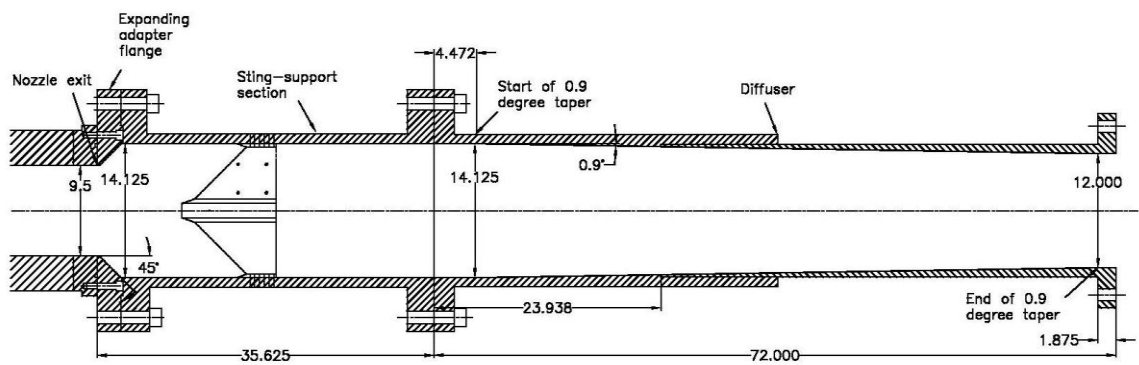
Schematic of modified sting-support and diffuser sections with test section.
